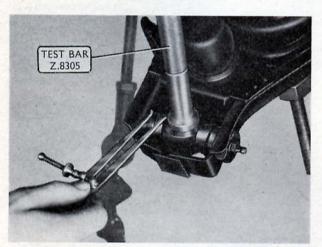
Checking that the trunnion is central in the arm using the test bar and calipers
